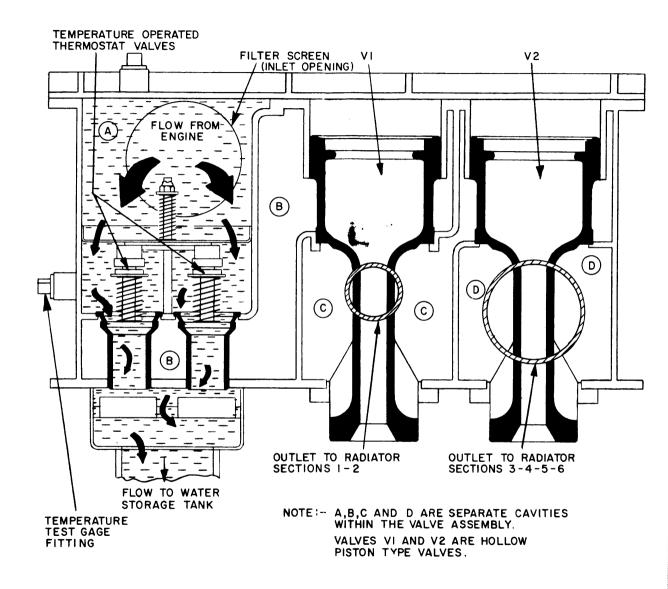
Flow-control valve operation (Condition: minimum engine cooling required)
